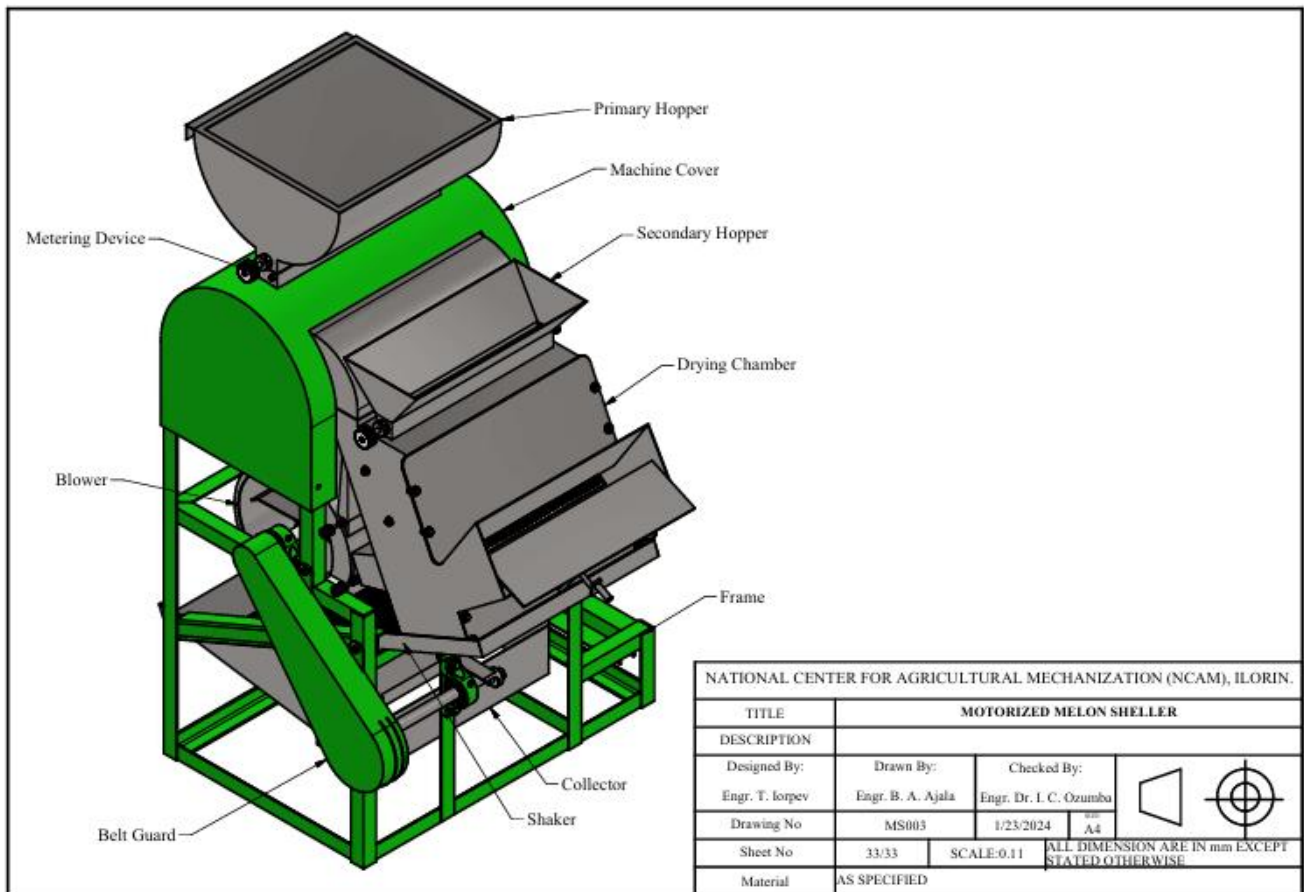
Engineering drawing of proposed improved version of the existing motorized melon sheller with separator.
